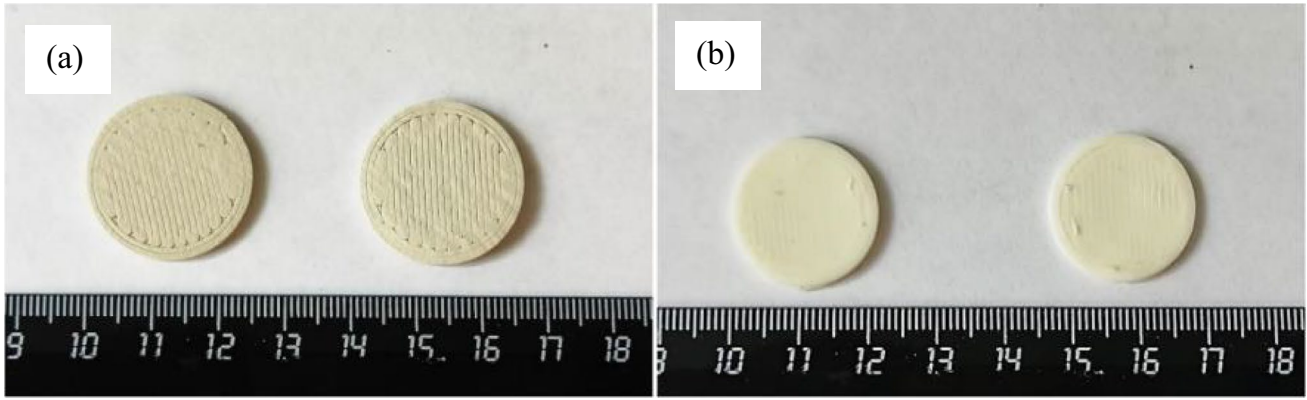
Alumina printed samples, a “green” samples, b sintering samples for the bending test
